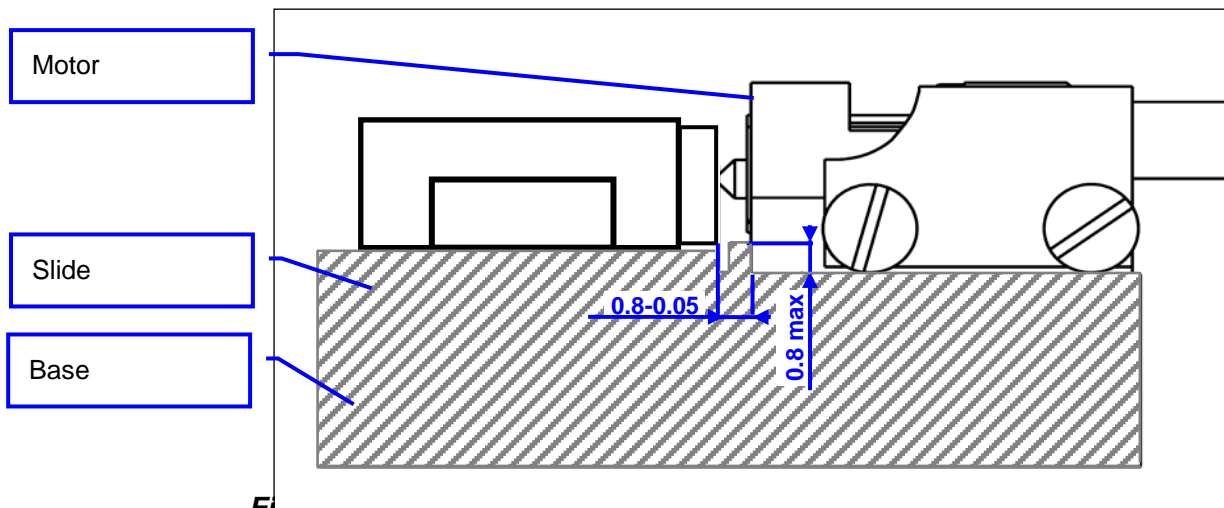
Setting a Distance between the Ceramic Strip and the Motor
